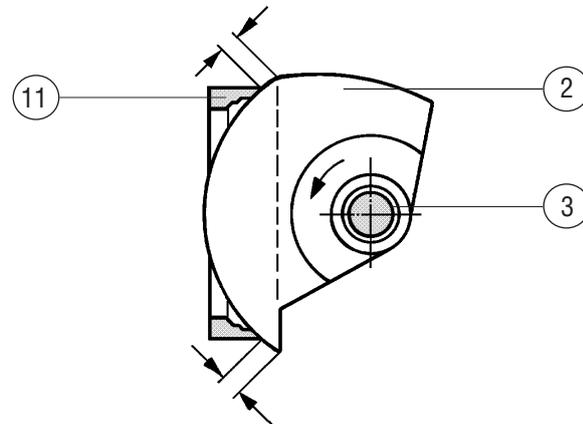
Locating of the ball sector sphere when adjusting the actuator
